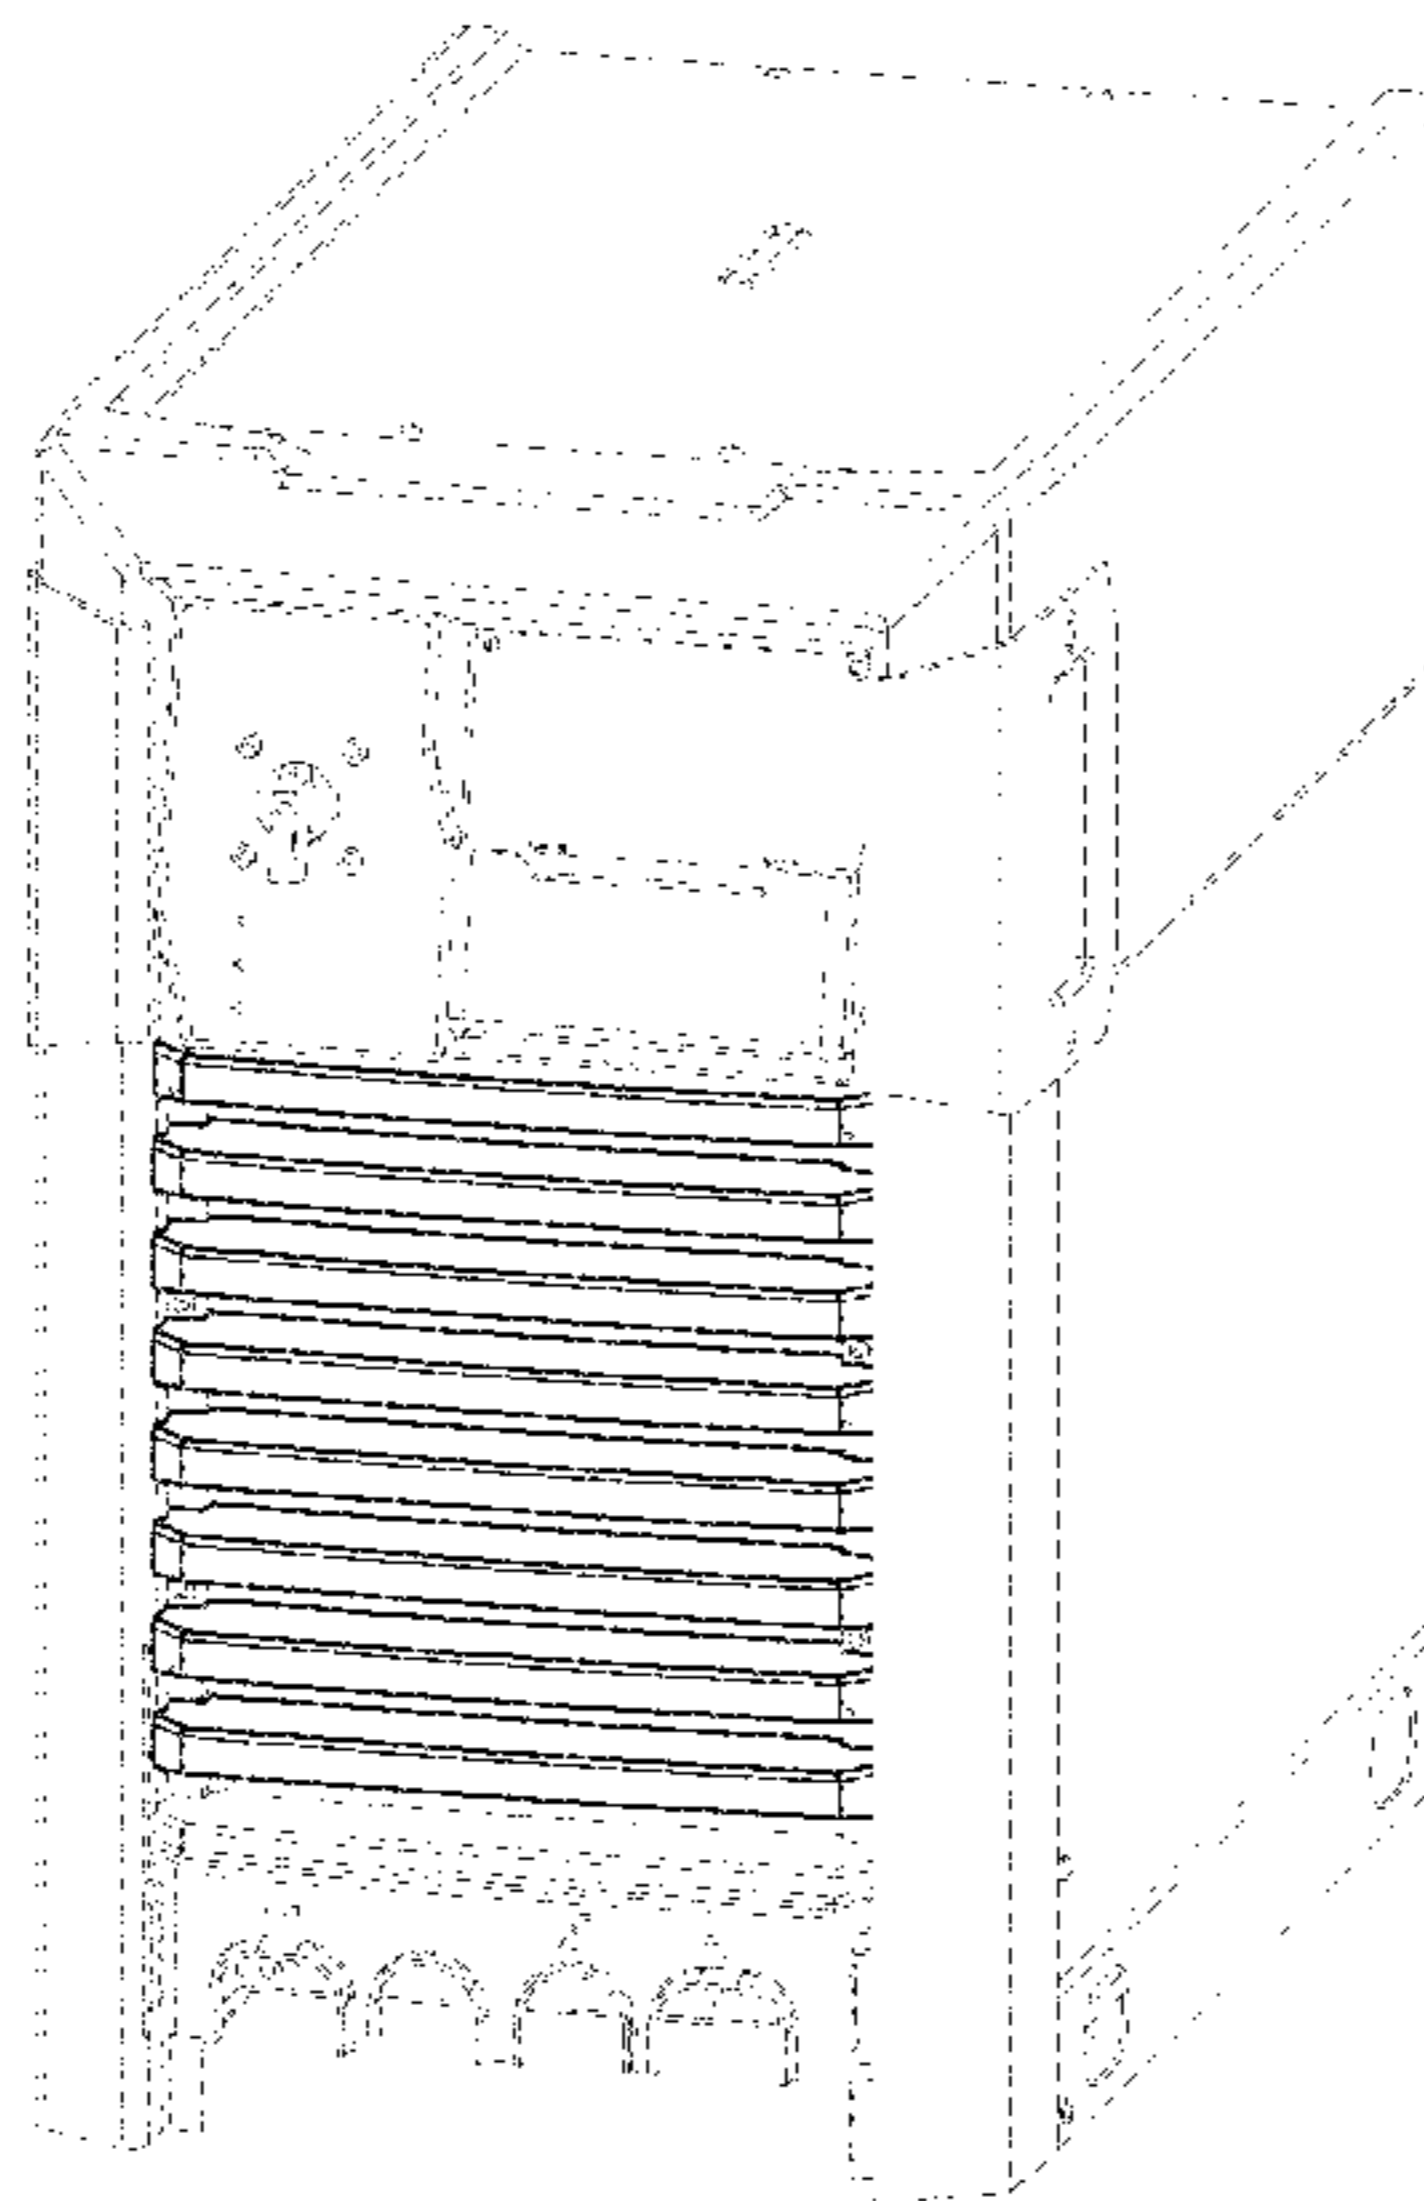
is a perspective view of the design for a welding power supply grill;
